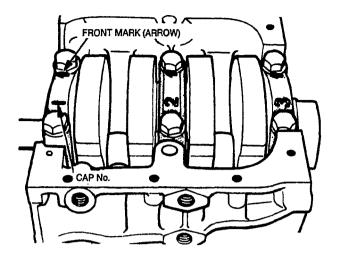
INSTALLING MAIN BEARING CAPS
